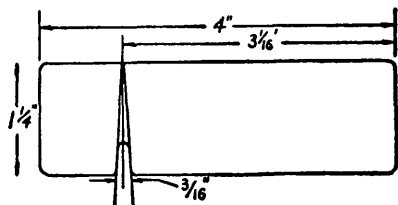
Dimensions for making a gauge to measure clearance between firewall and clevis pin at accelerator cross shaft when adjusting accelerator linkage on Commander. 1950-52
